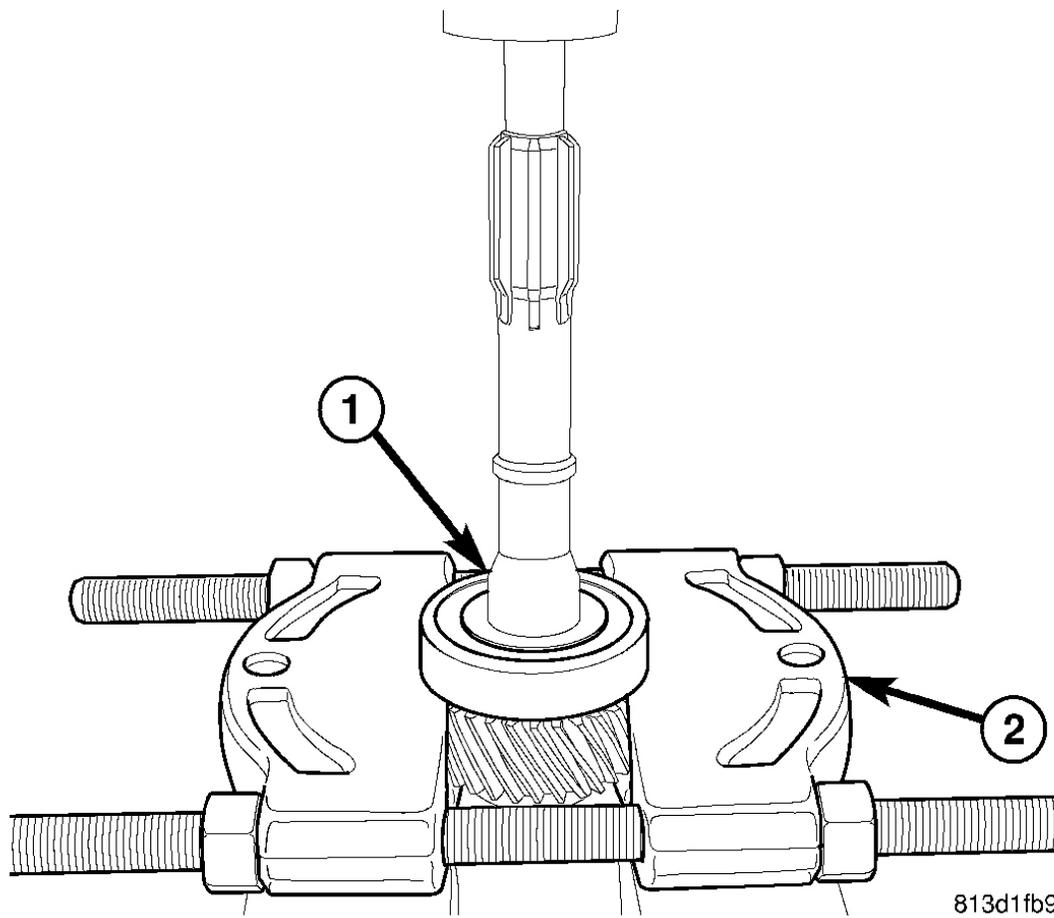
Identifying Input Shaft Bearing & Splitter 1130
